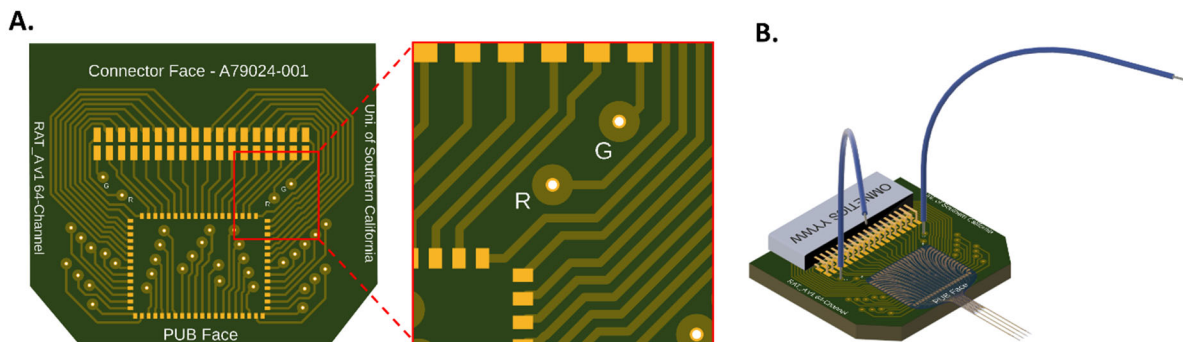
A. CAD model of PCB. G and R indicate 'ground' and 'reference' plated-through holes (PTHs). B. CAD model of assembled MEA, PCB, Omnetics connectors and ground wires.
